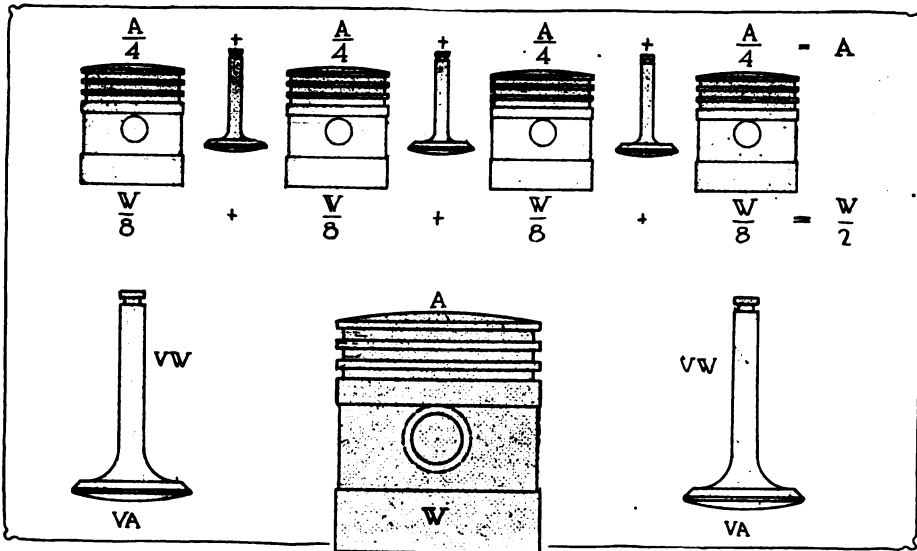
Illustrating Newcombe's law. Above—Four pistons each half the size of the large piston shown below or 3 inches in diameter. This shows how by decreasing size an equal piston area is obtained while the reciprocating weight is thereby cut exactly in half. Below 3 inches mechanical difficulties limit carrying the law to the extreme
